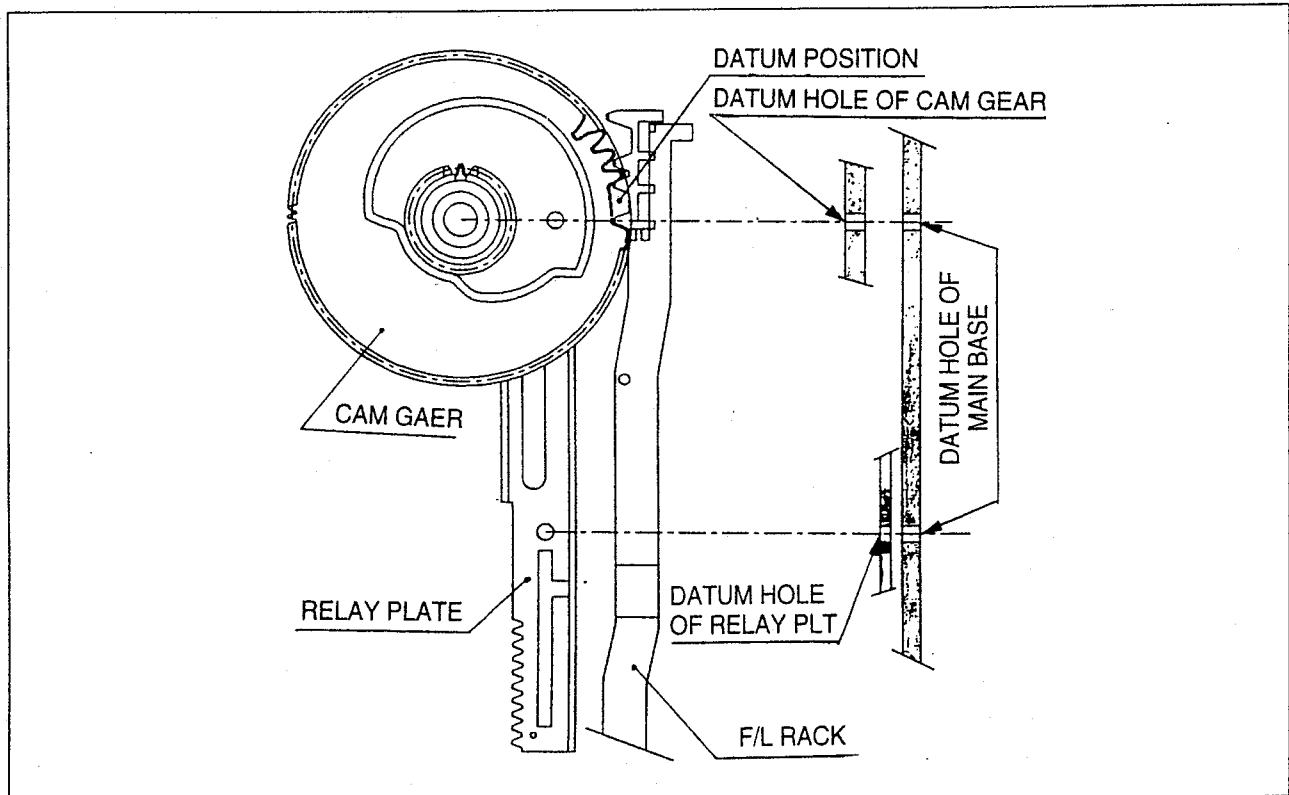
DATUM POSITION OF RELAY PLATE & CAM GEAR
